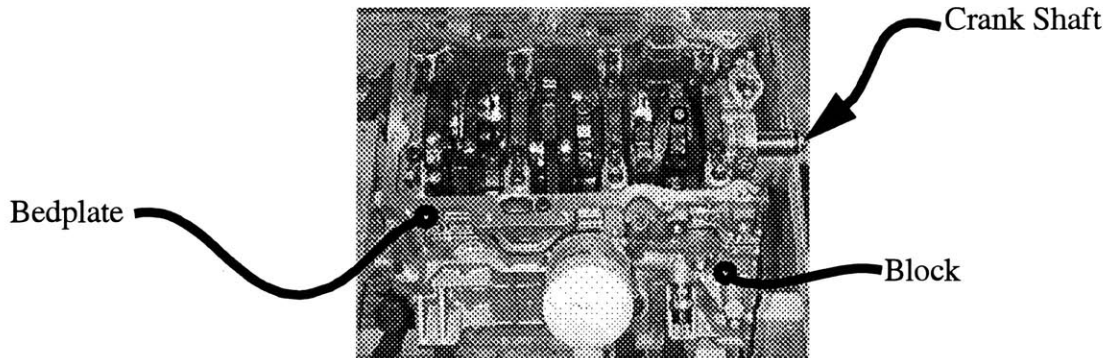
Block and Bedplate Assembled With Crankshaft and Main Bearings In Place
